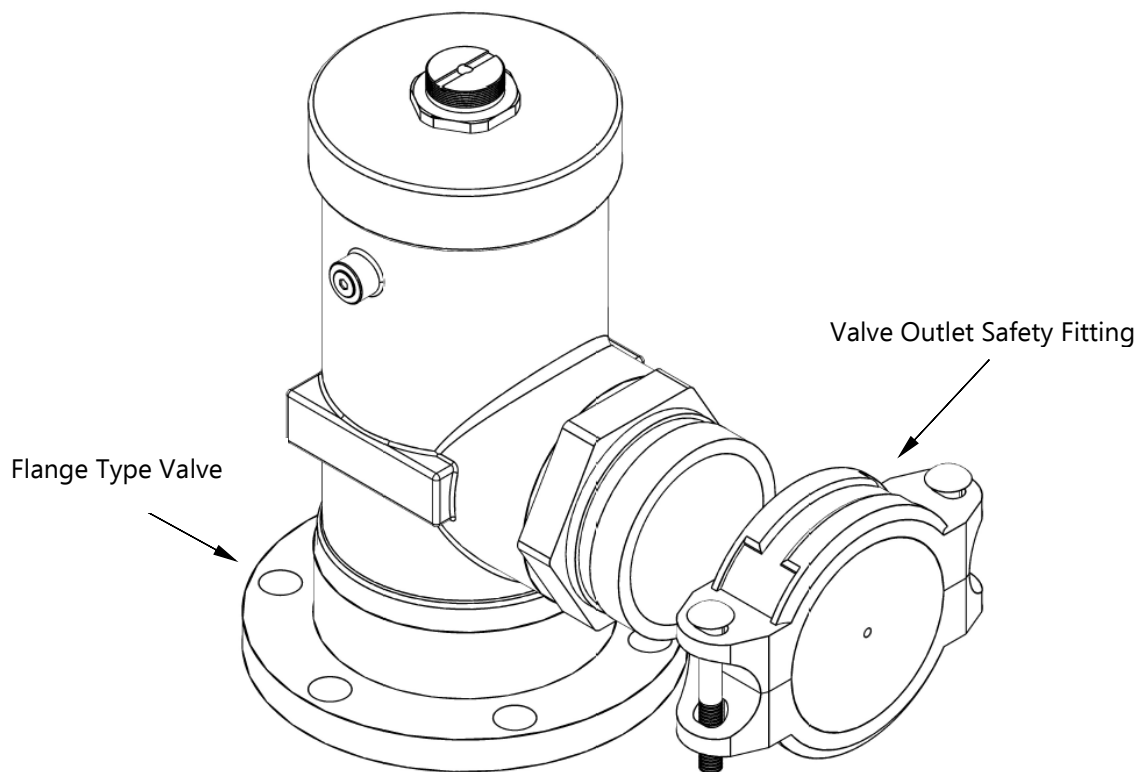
3" Flange Type PYRO-5112 Valve
